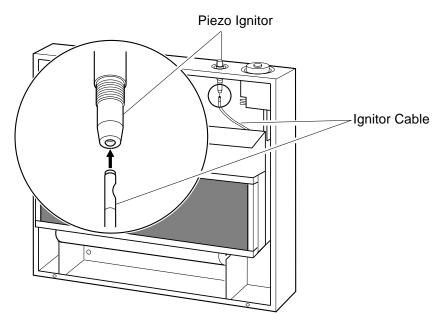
Attaching Ignitor Cable to Piezo Ignitor
